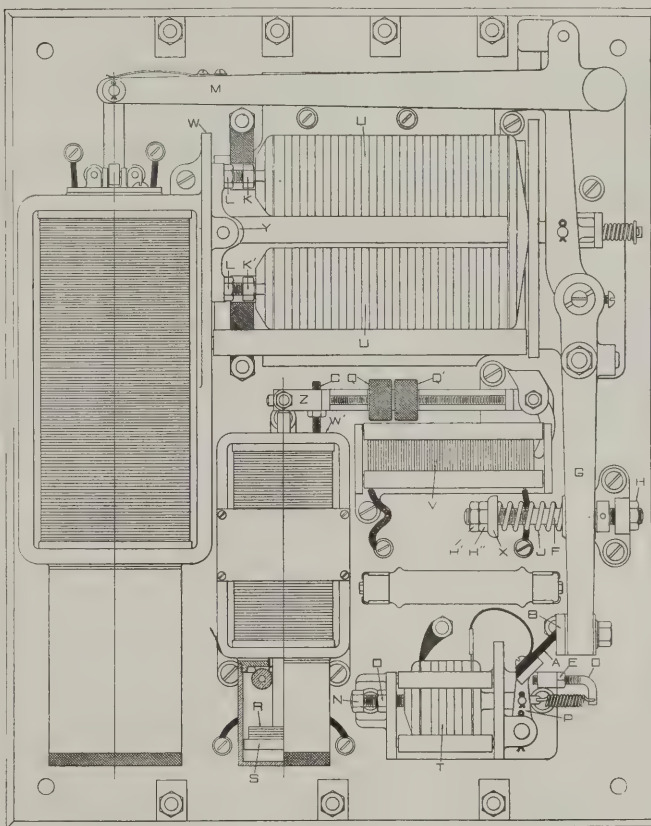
Outline Drawing Showing Arrangement of Apparatus on the Types "M" and "M2" Lamp Regulators
